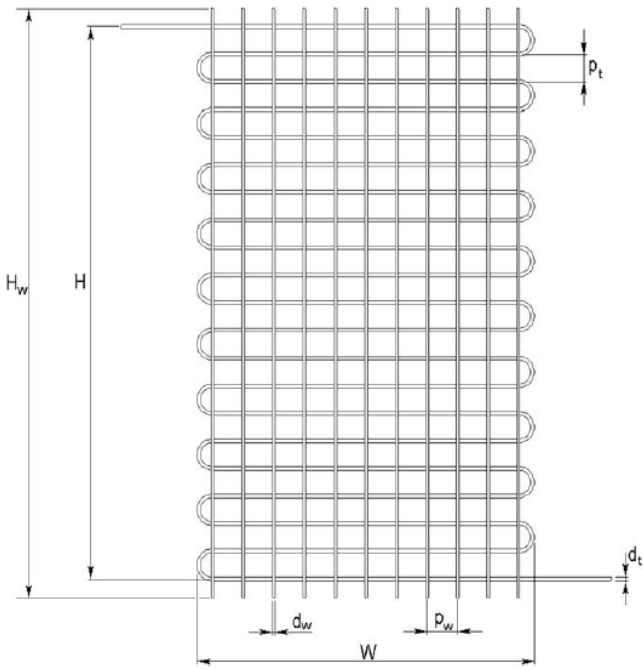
Wire and tube type heat exchanger geometrical parameters [10].
